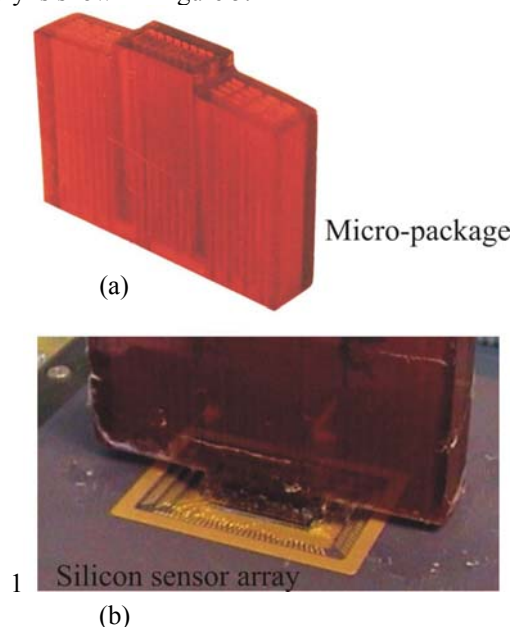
Photographs of (a) MSL micro-package and (b) final assembled system.
